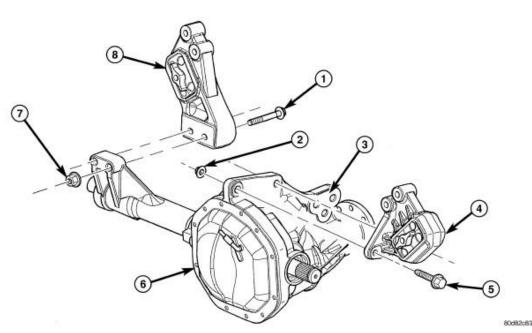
ENGINE INSULATOR MOUNTS 4X4 Courtesy of CHRYSLER LLC
